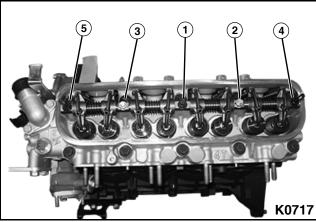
Rocker Arm Assembly Tightening Sequence
